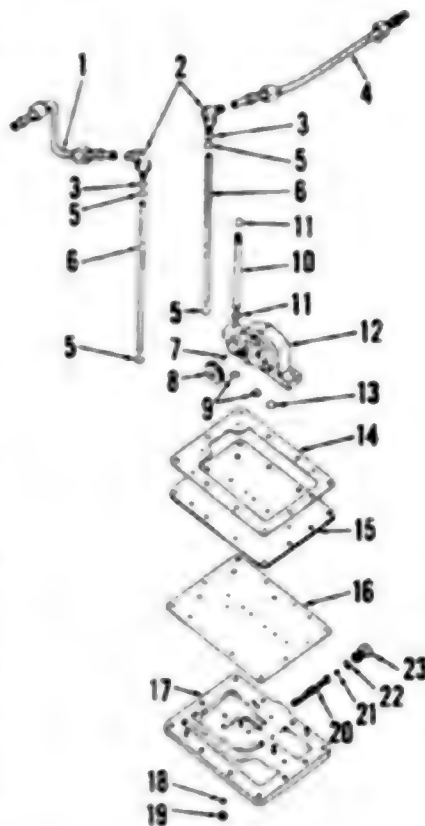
Exploded view of torque amplifier pump and component parts. Regulator valve in valve body (17) is serviced only with the valve body. TA pump (12) is serviced only as an assembly.
